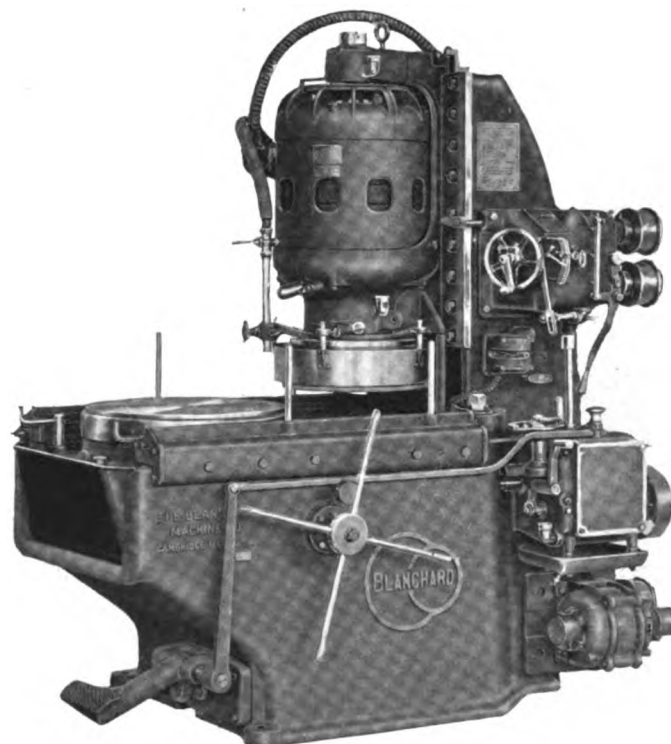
No. 16 Grinder, Direct Motor Drive Type
